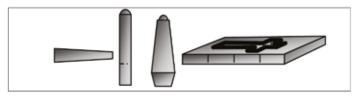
Lifting Equipment – (L to R) Lifting Lug with Wedge, Snotter Plug and Spreader Plate
